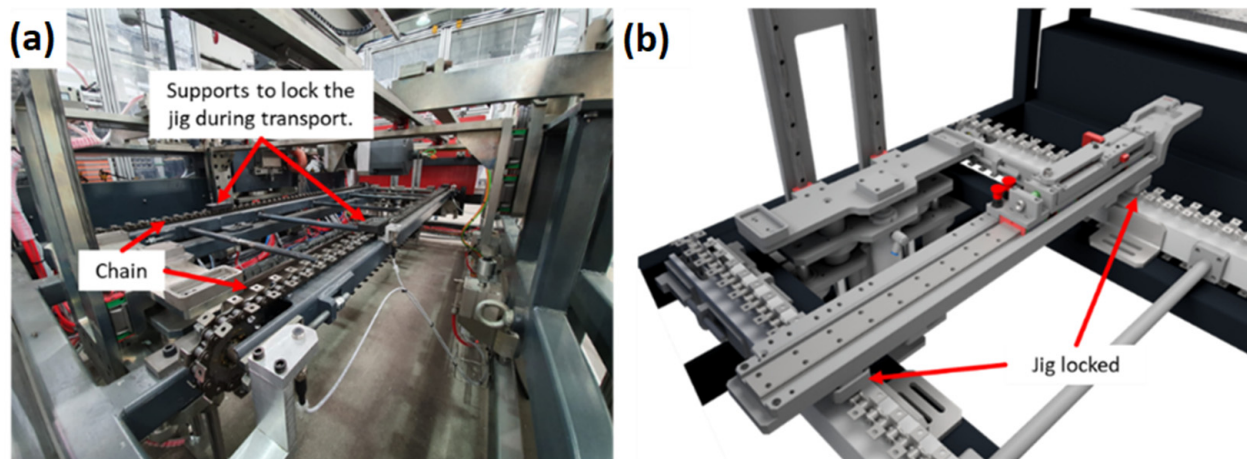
(a) Return carrier and (b) jig being moved within the equipment.
